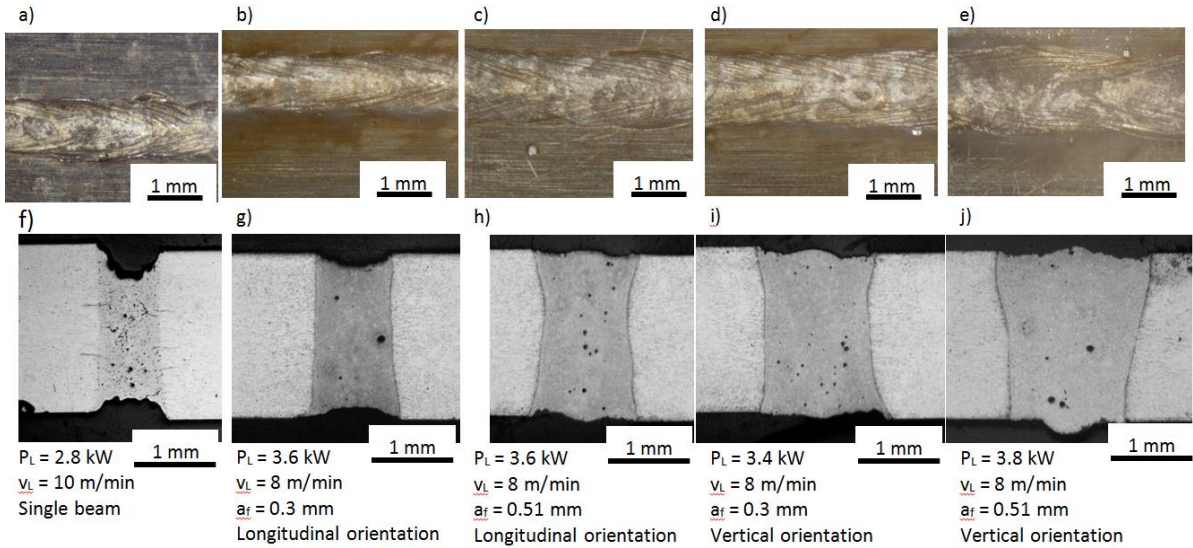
Weld seams welded with 200 μ m diameter dual beam at 2 mm sheets of AA 7075; a) reference with single beam; b) to d): top view of weld seams with welding velocity of 8 m/min (10 m/min single beam) and with different distances of foci of 0.3 mm and 0.51 mm (a_f) and orientations; f) to j) cross sections according to top views
